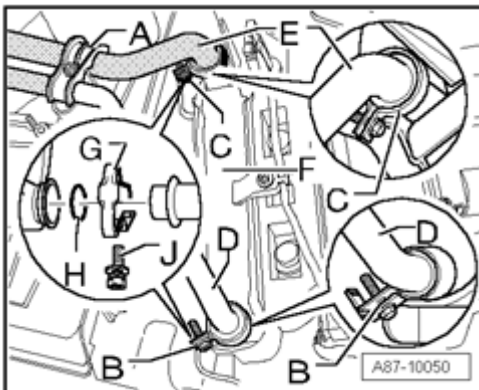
Identifying Coolant Pipes, Holder, Clamps, And Heater Core
